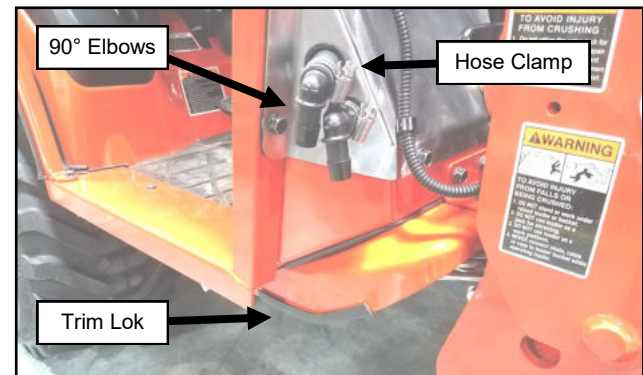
(90° Heater Hose Elbow and Trim Lok)
